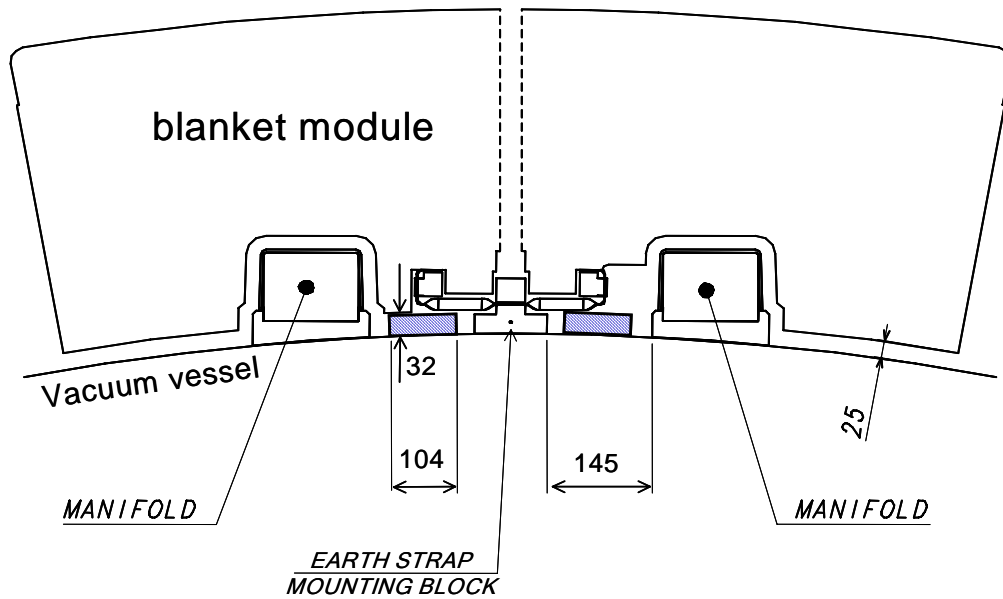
Top view of the blanket module on vacuum vessel. The blue hatched region is the clearance space throughout the path shown in Figure 26.
